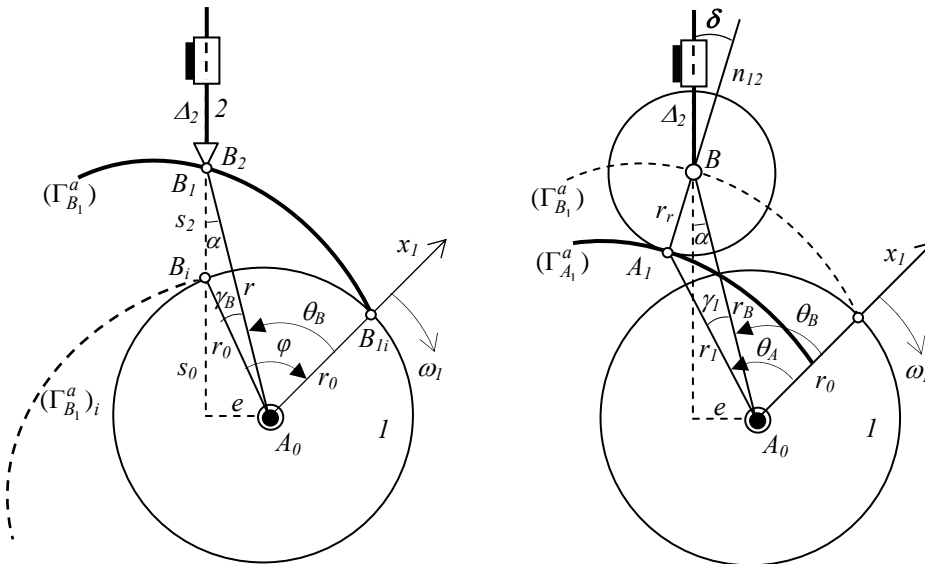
Kinematic schema of mechanism with disc-cam and translating tip / roller follower
